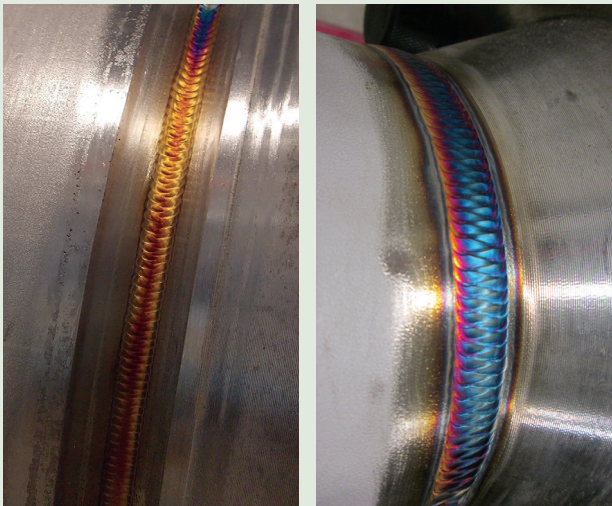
Left – Observations of piping weldments, manual GTAW hot pass/second pass, 30 in. diameter, 316L Stainless Steel pipe. Right – Manual GTAW cover/cap pass, 12 in. diameter, 316L Stainless Steel reducer fittings.
